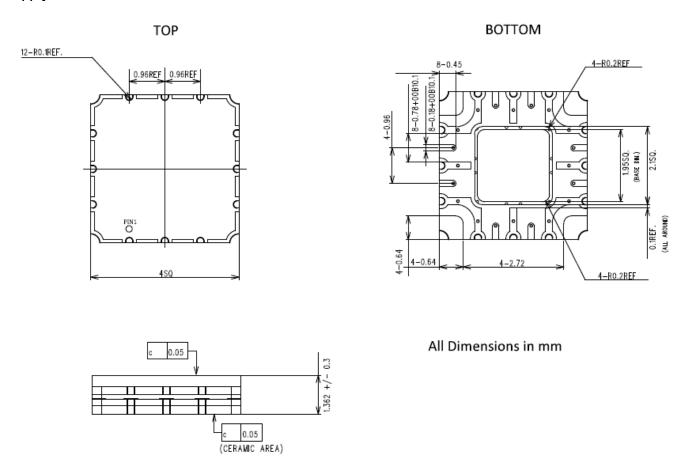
CQFN 24-Pin Package Drawing (All Dimensions in mm)
